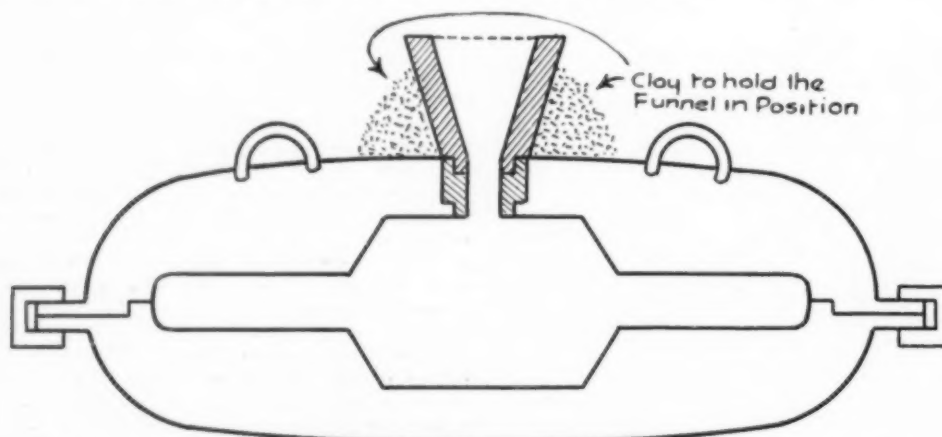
Section of Mould for casting Wheel Centres, showing the two segments clamped together and the funnel in position for pouring.
